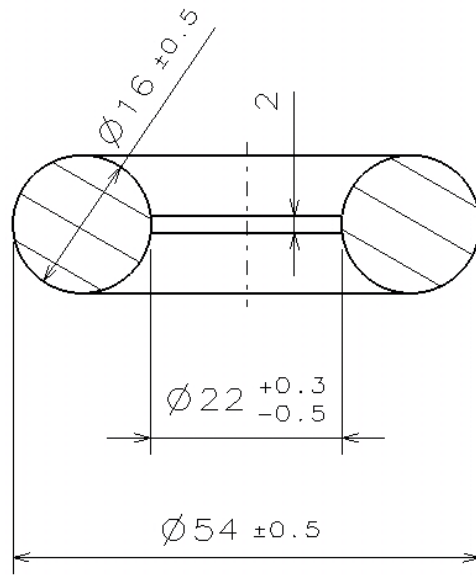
Technical Drawing of “Ring” [60] (Dimensions are in millimetres.)
